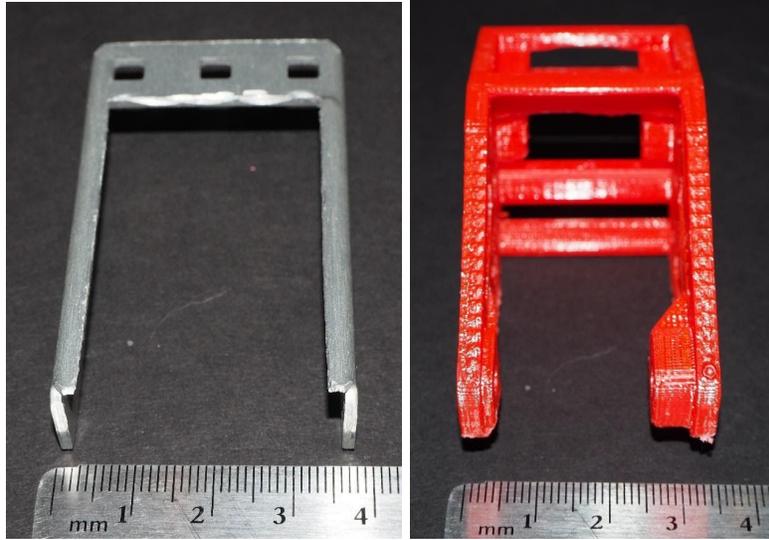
Figure E: Tracking wheel widths: cut c-channel (left) and 3d printed bracket (right)
